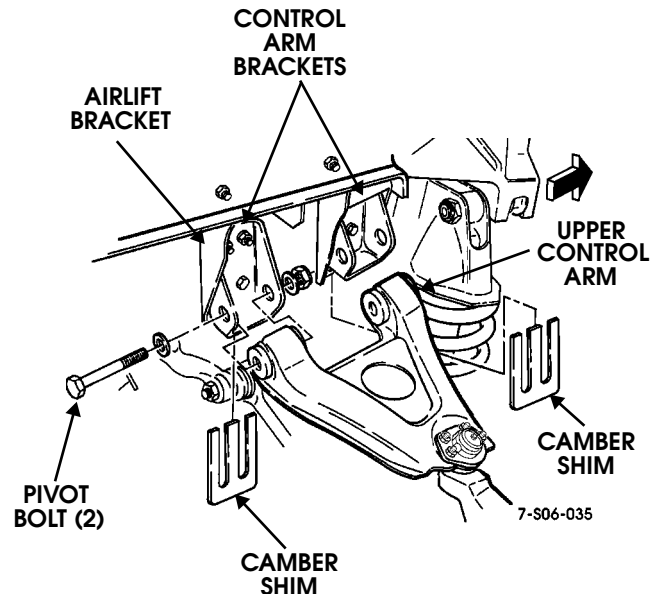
Camber Shim Location (Passenger Side Front Shown)
